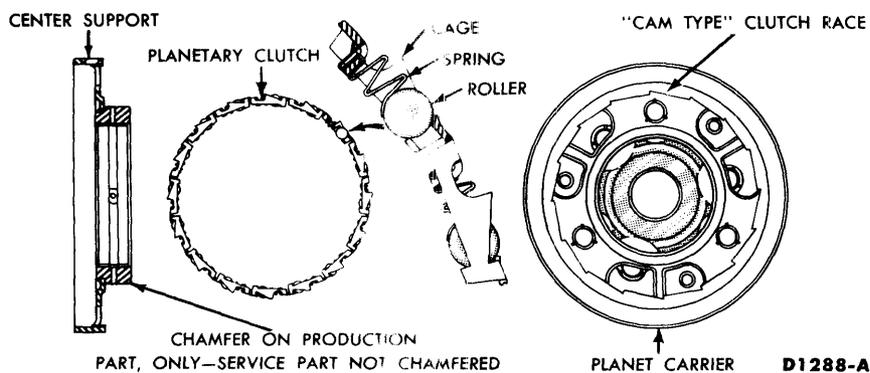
Planetary Clutch, Planet Carrier and Center Support
